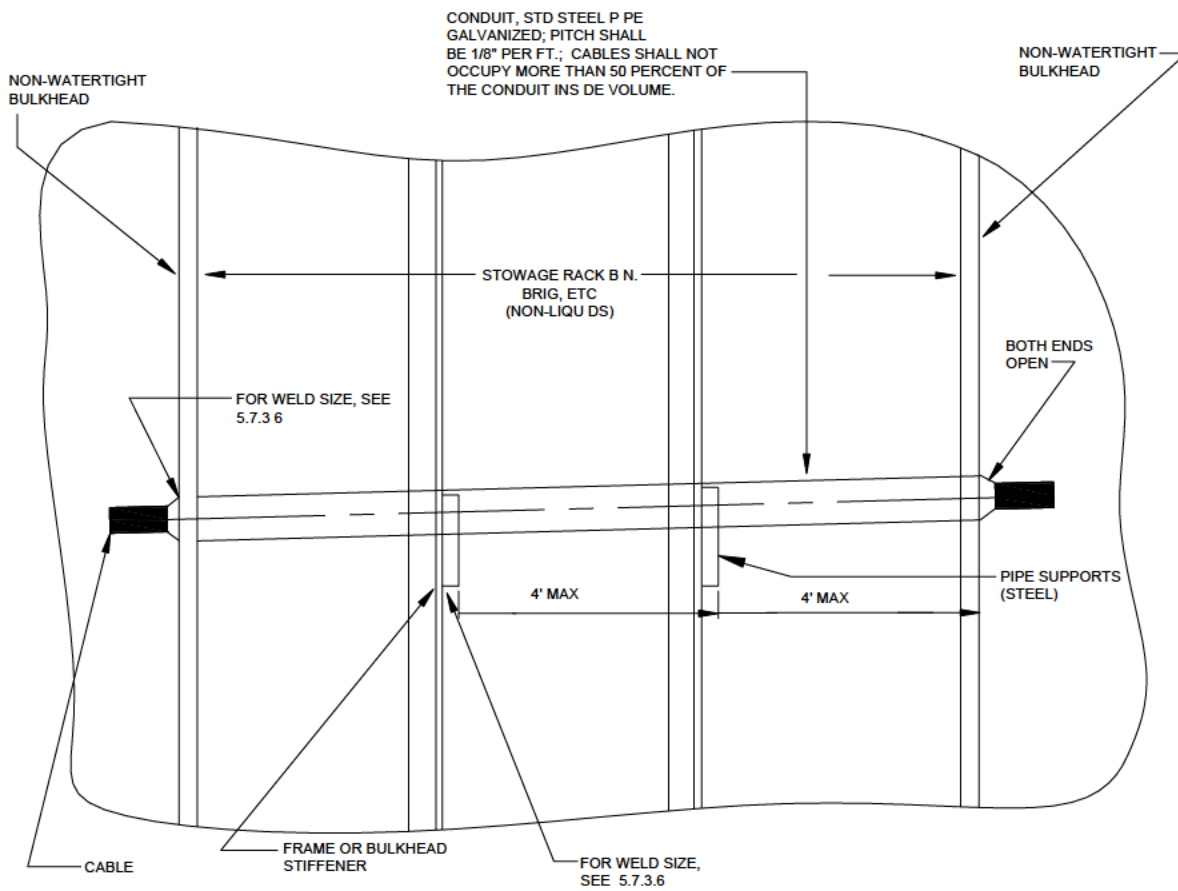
B48. Cableways through storage spaces and tanks (surface ships).
